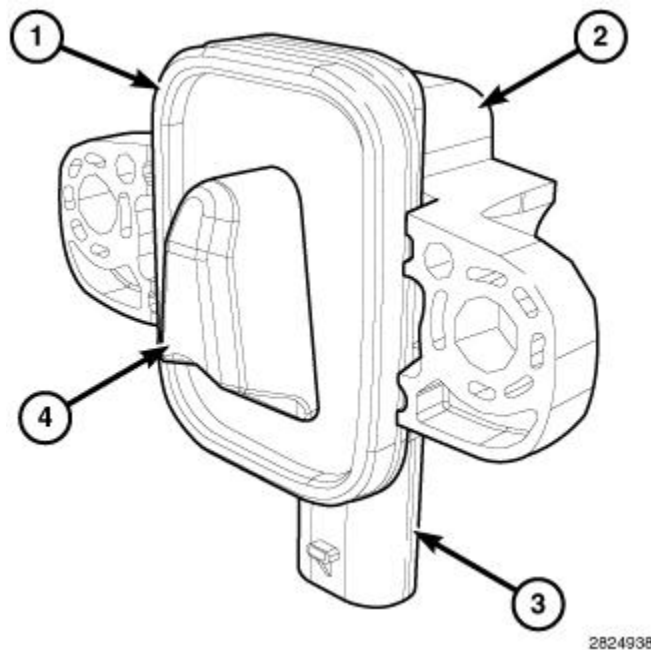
Sensors, Resilient Gasket, Connector Receptacle & Water Shield
